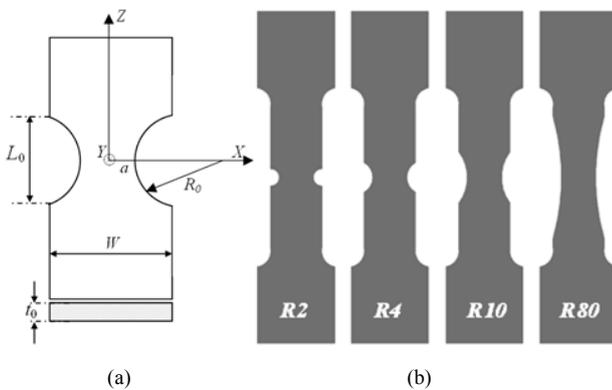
Flat grooved plane stress specimen: a) the cross section b) geometry of flat specimens.
